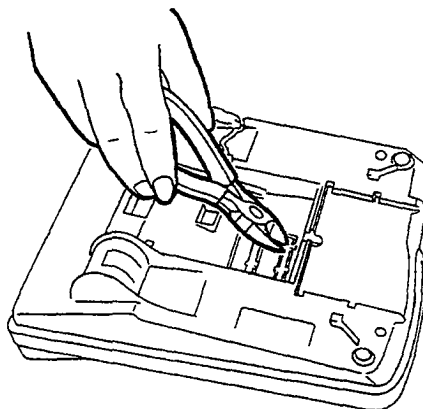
Removing the Knockouts to Install ADA(1)-W (BK)/(SW) Unit or ADA(2)-W (BK)/(SW) Unit
